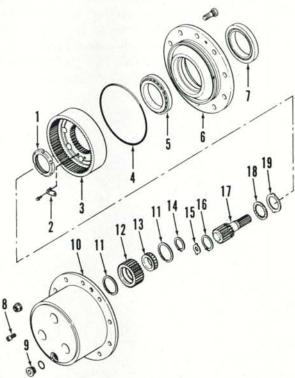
Exploded view of wheel hub and planetary unit used on front drive axle.
